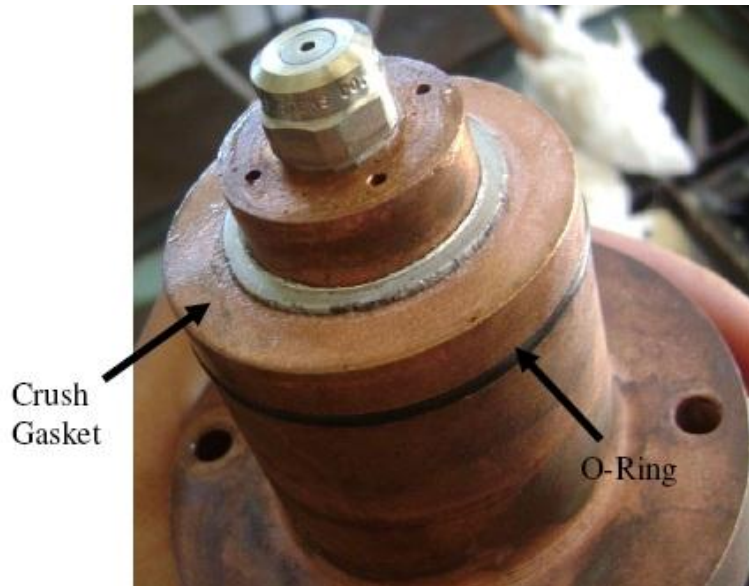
Rocket injector plate with o-ring and aluminum crush gasket.²
